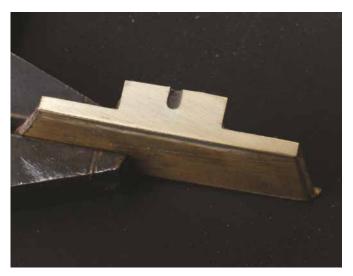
The test piece is then sliced in half to show a cross-section of the sample. It reveals a small amount of solder left in the reservoir, but not enough to force solder to spread on to the sheet.
